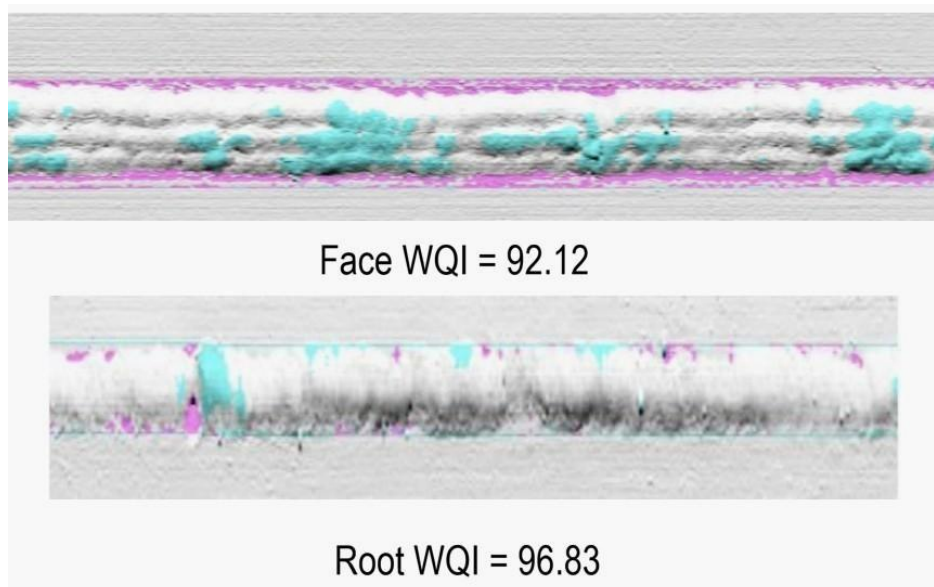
Deviation from the reference for the face and root surfaces of the weld. (Face WQI = 92.12; Root WQI = 96.83).
